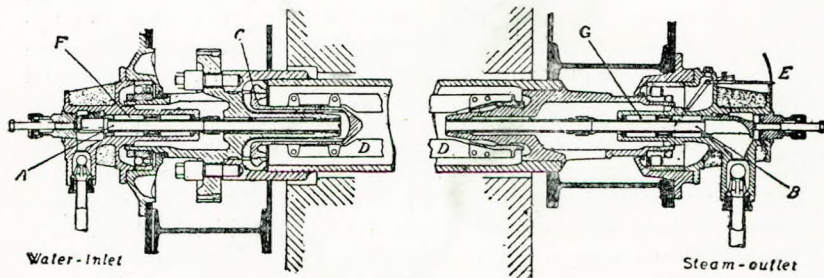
Section through joints of the "Atmos" boiler showing the ends of a Rotary Tube and the Patent Stuffing Boxes.
